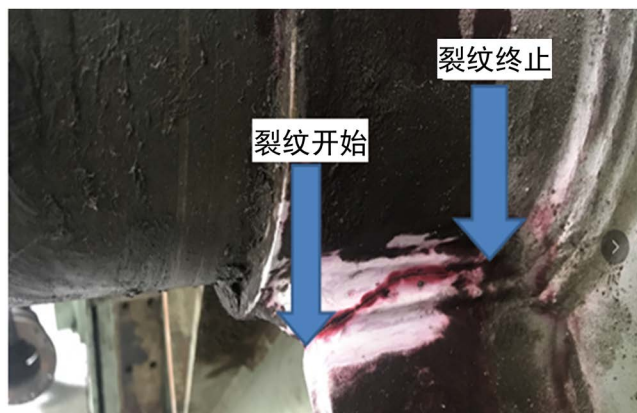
Initiation and propagation of weld crack on fixed end shaft and rib plate
